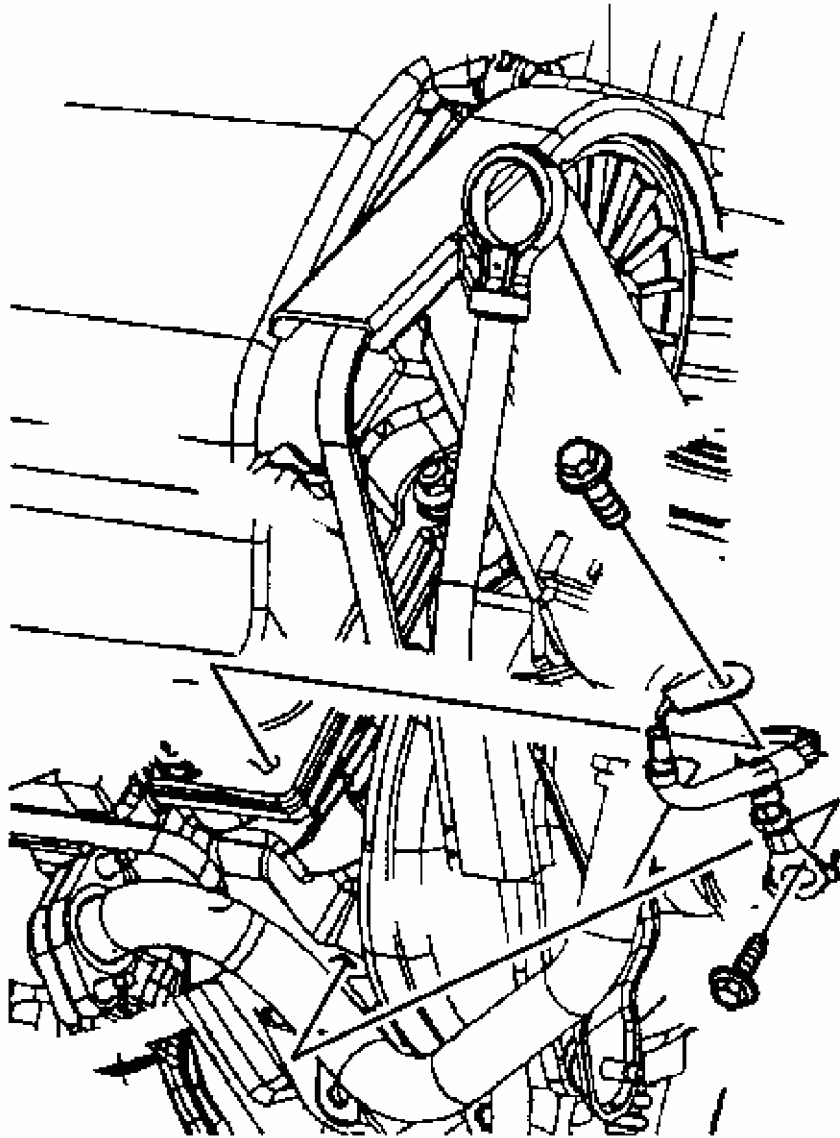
Identifying Left Camshaft Cover Ignition Coil Ground Strap Bolt
